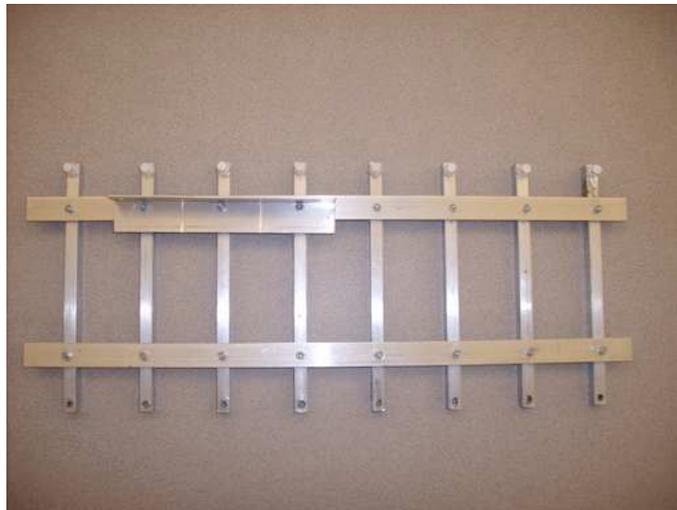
Assembly of the first set of rails and card-edge guides. Note the shorter hole spacing to the right, the 110/220VAC regulated power supply mounting bracket, and the larger holes at the bottom of the fourth card-edge guide from the left.
